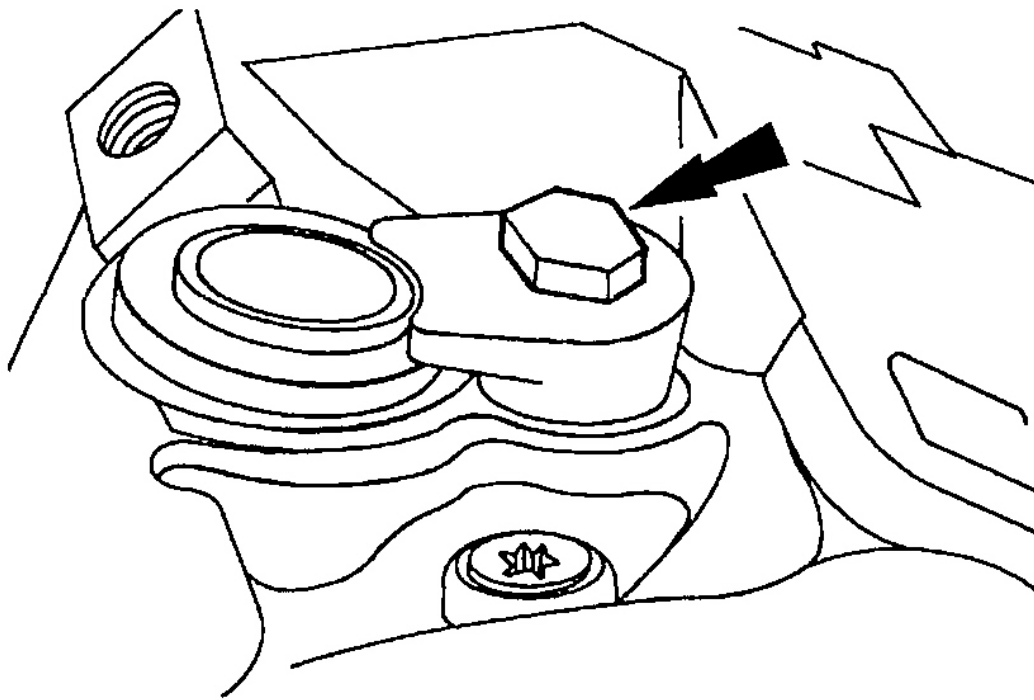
Removing Rear Cassette With Camshaft Drive Chain
